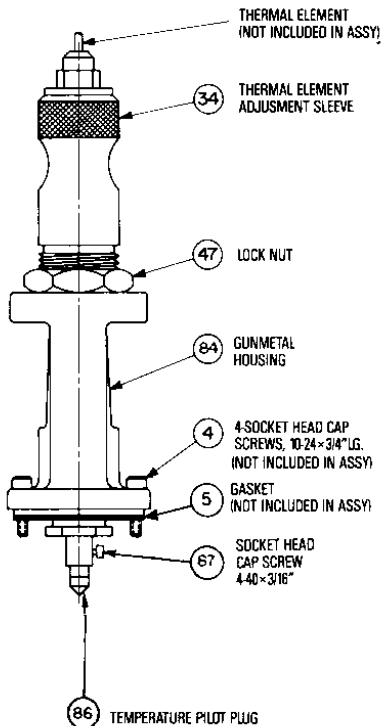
SUPERSTRUCTURE ASSEMBLY (1)
